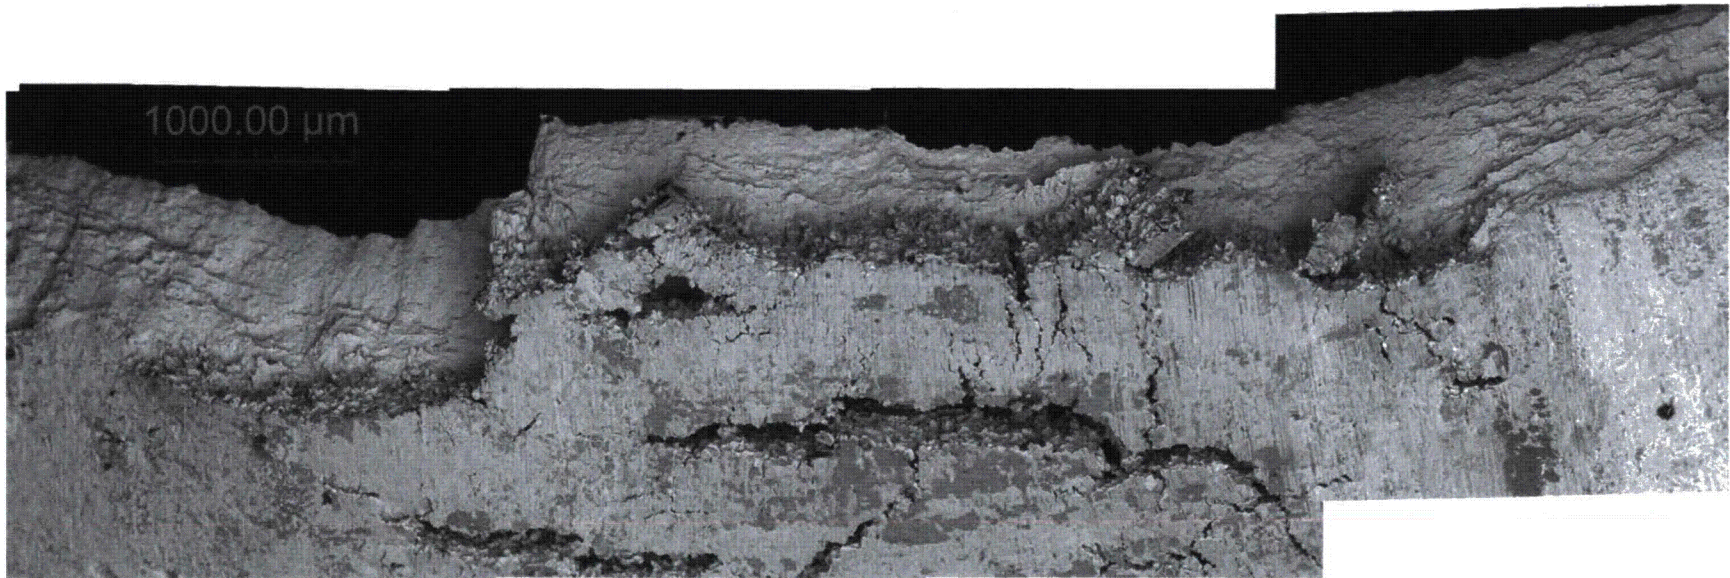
OD Surface of R19C38 02H, Adjacent to Burst Opening (Axial Direction is Horizontal)
